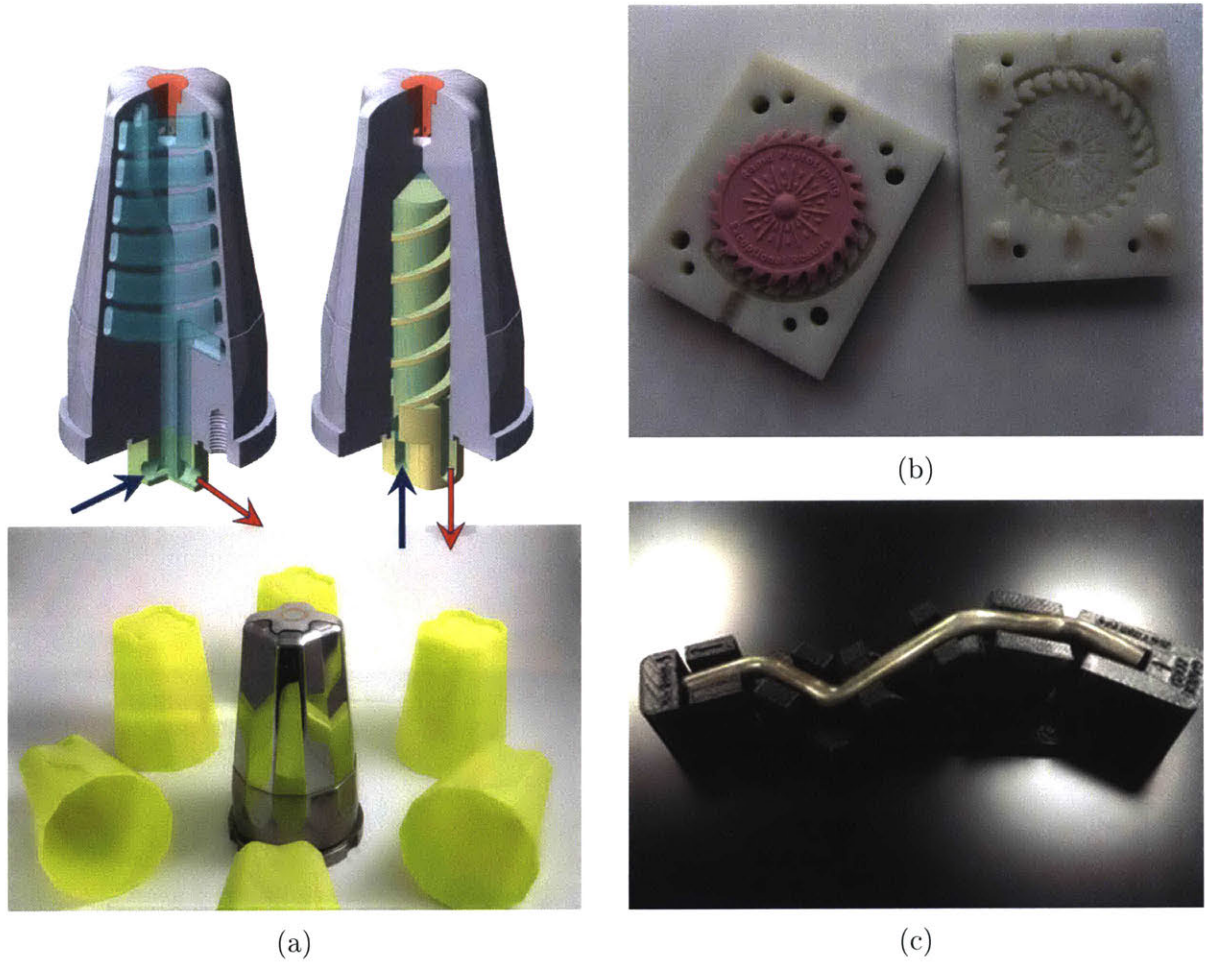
Examples of additively manufactured tooling including (a) and injection molding die with optimized cooling channels (left) compared to a traditionally manufacture die (right), (b) a mold printed for casting polymers, and (c) custom designed fixture for holding a bent structural tube [22][24][23].
